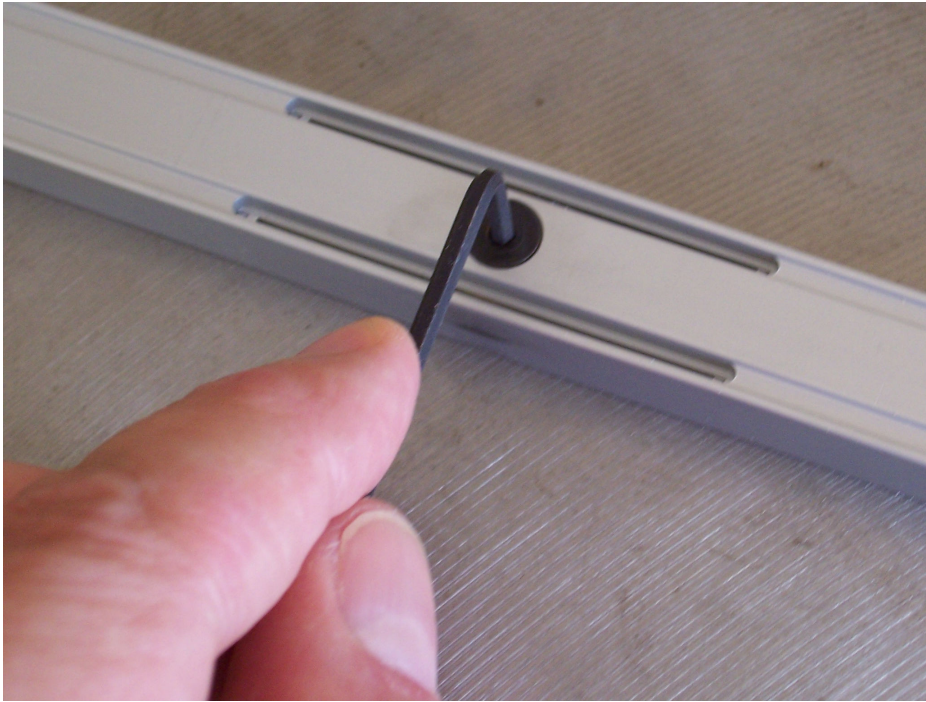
Panel cutting jig with Aluminum Incra miter slider.
